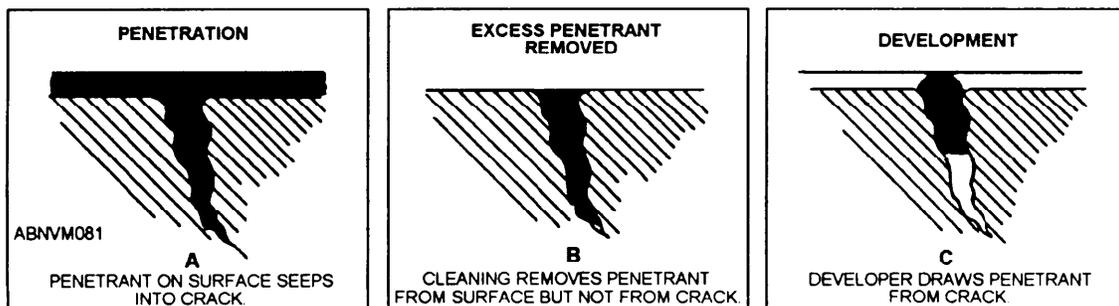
Principles of liquid penetrant inspection.
